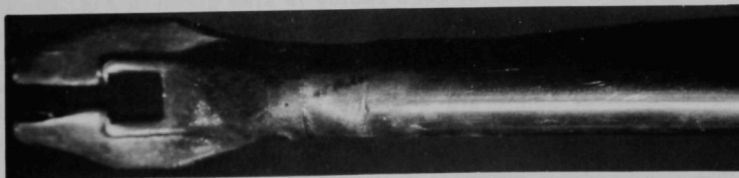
Normal Spade-to-Tube Weld on Element E47 at 180° from View in Fig. 7. ANL Neg. No. ID-103-L5100.
